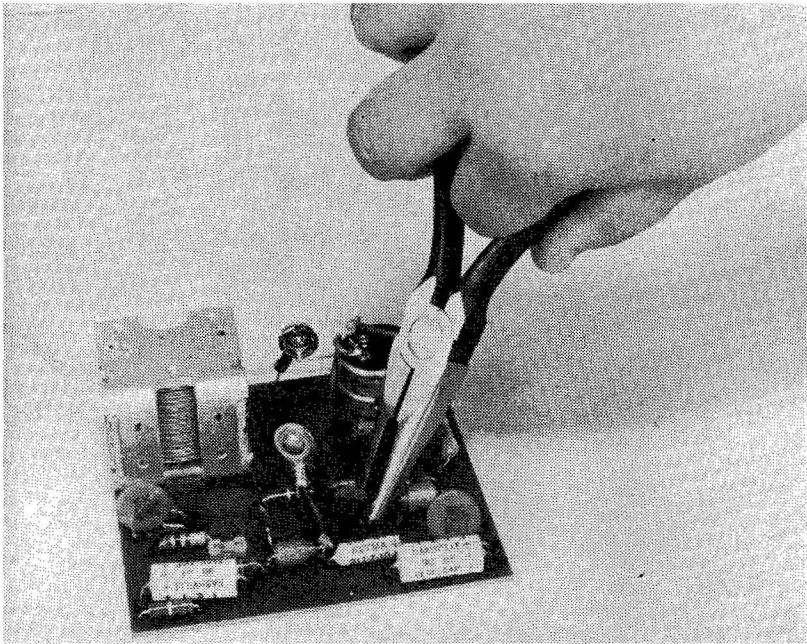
Using end-cutters to remove a ceramic capacitor from an etched circuit board.
